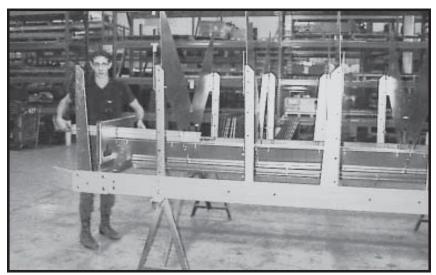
Placing meter roll assemblies through (front) bottom auger bearing plate.
